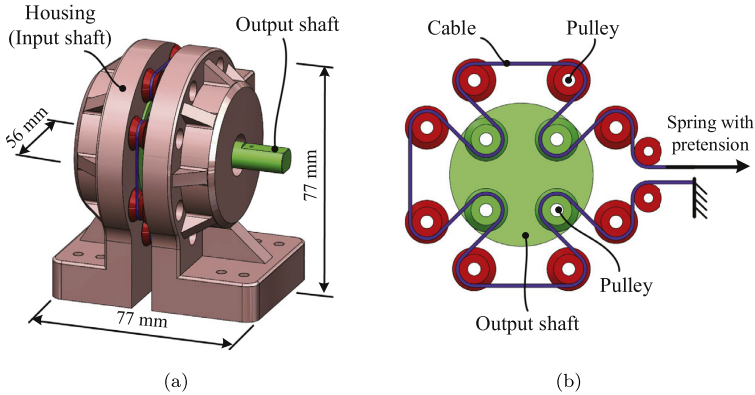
JVSr design for experimental test. (a) CAD Model of the JVSr prototype. (b) Design of cable arrangement.
